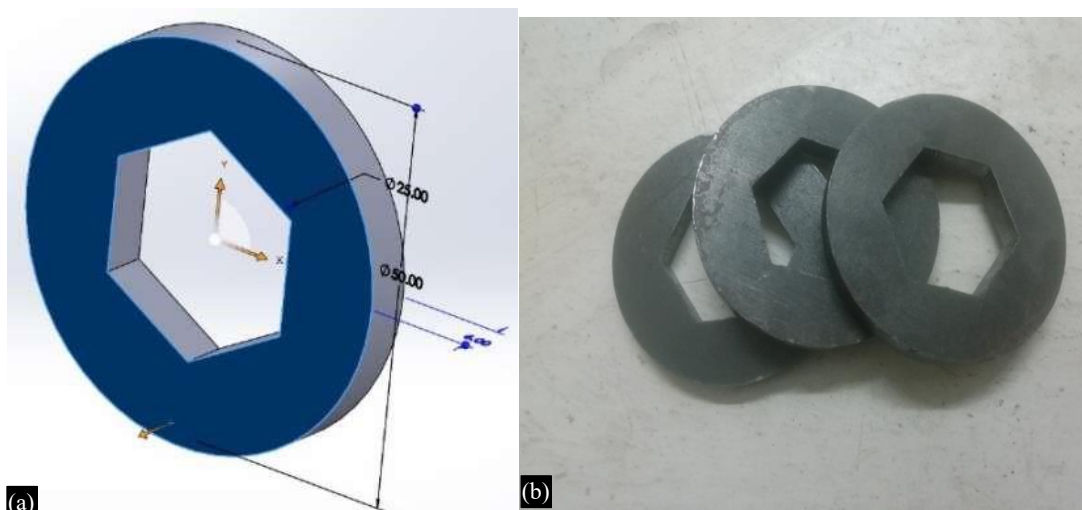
(a) Design of spacer; (b) Fabricated spacer
